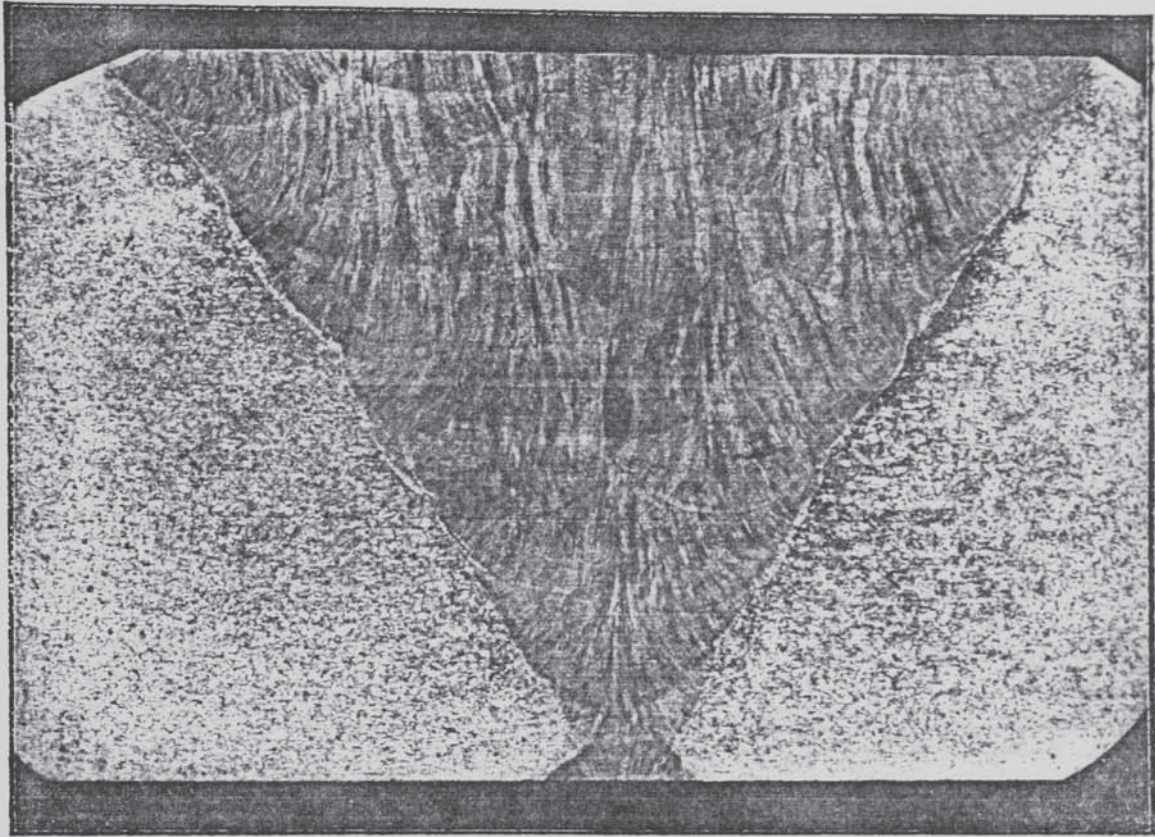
Single-V weldment, made by MMA process, etched in Ferric Chloride (25 mm thick), showing long columnar grains extending through successive weld runs
